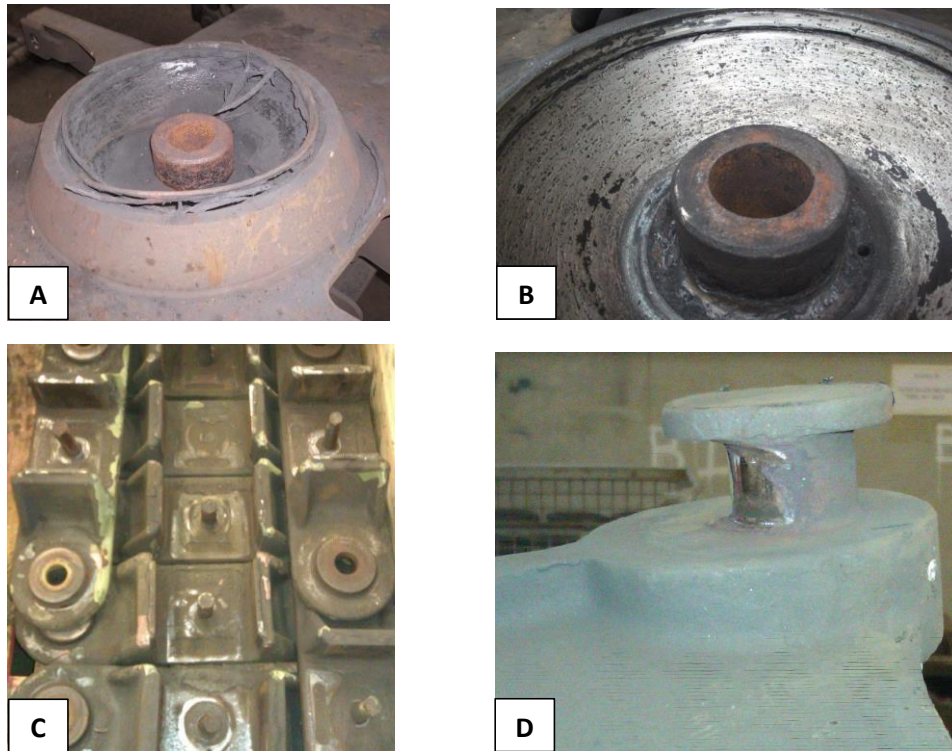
Secondary suspension system components (Worn state): (A) Centre bowl/damaged wear liner. (B) Pitting marks and material transfer on the centre bowl. (C) Damaged side bearer housings. (D) Worn spring cap connecting pin.
